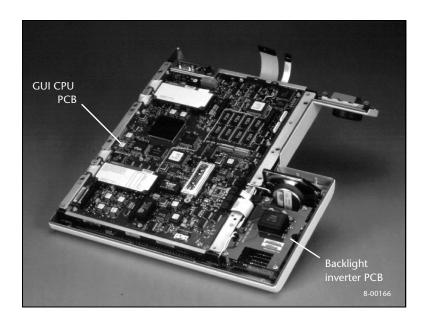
9.4" GUI CPU PCB and backlight inverter PCB in place
